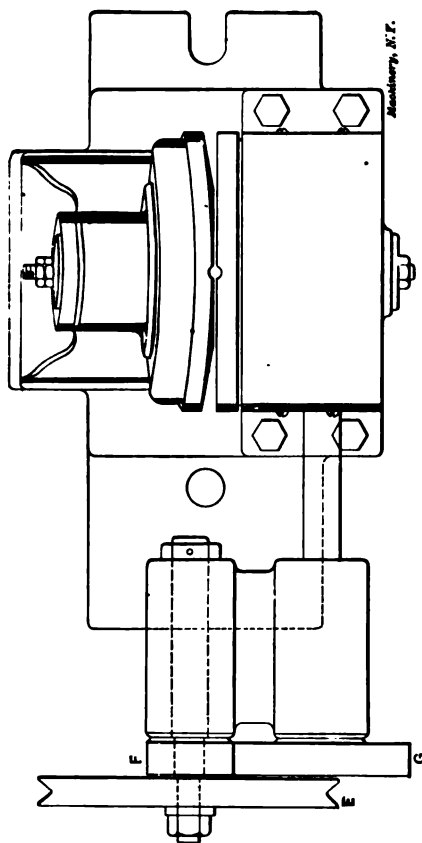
Screw Slotting Fixture for Continuous Operation.
